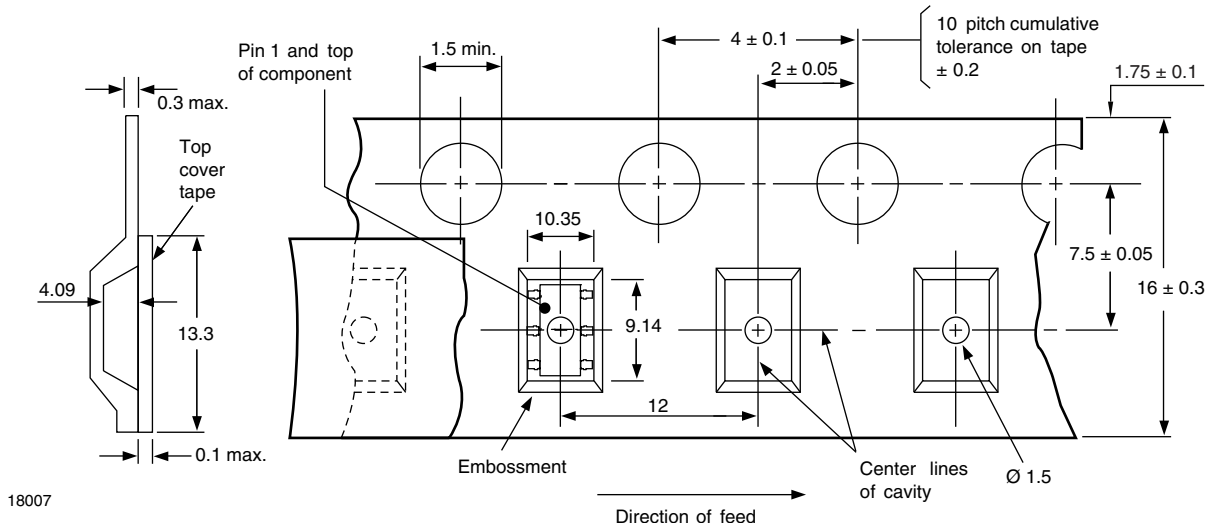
Tape and Reel Shipping Medium (1000 pieces on reel)
